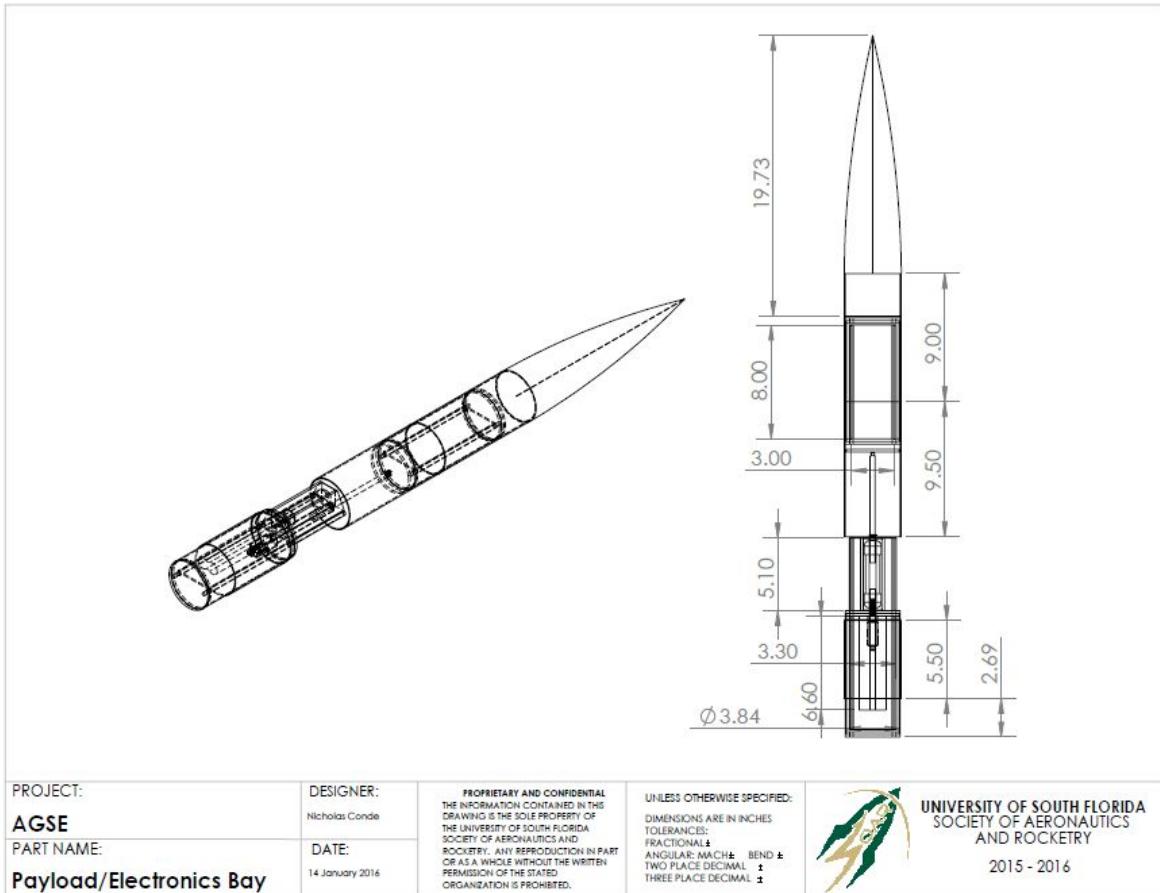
Dimensional Drawing of the Payload System
